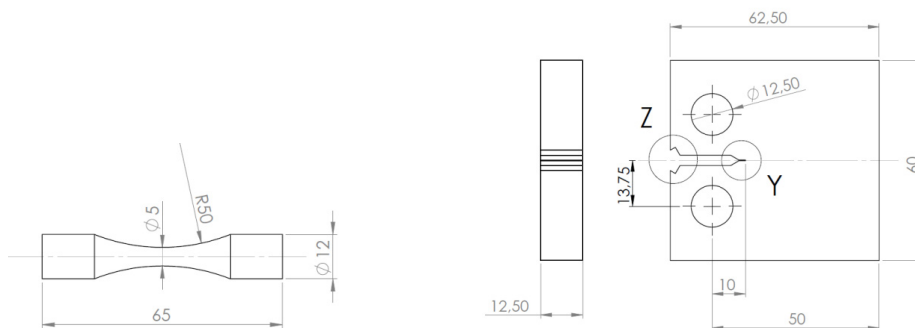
Hour-glass shaped specimen for HCF tests (left) and CT-specimen for crack propagation tests (right).
